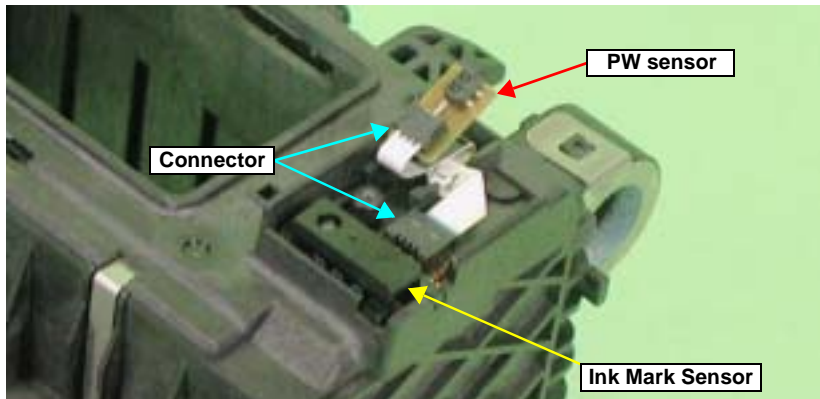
Removing the Ink Mark Sensor and PW Sensor
